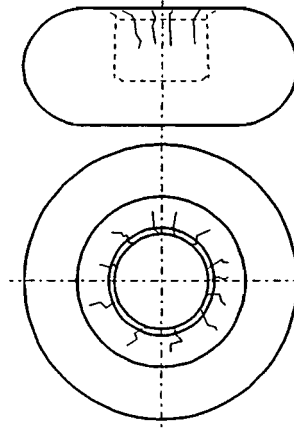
η -Crack, a crack on the upper and side surfaces of the concave portion of the upper surface of a specimen.
